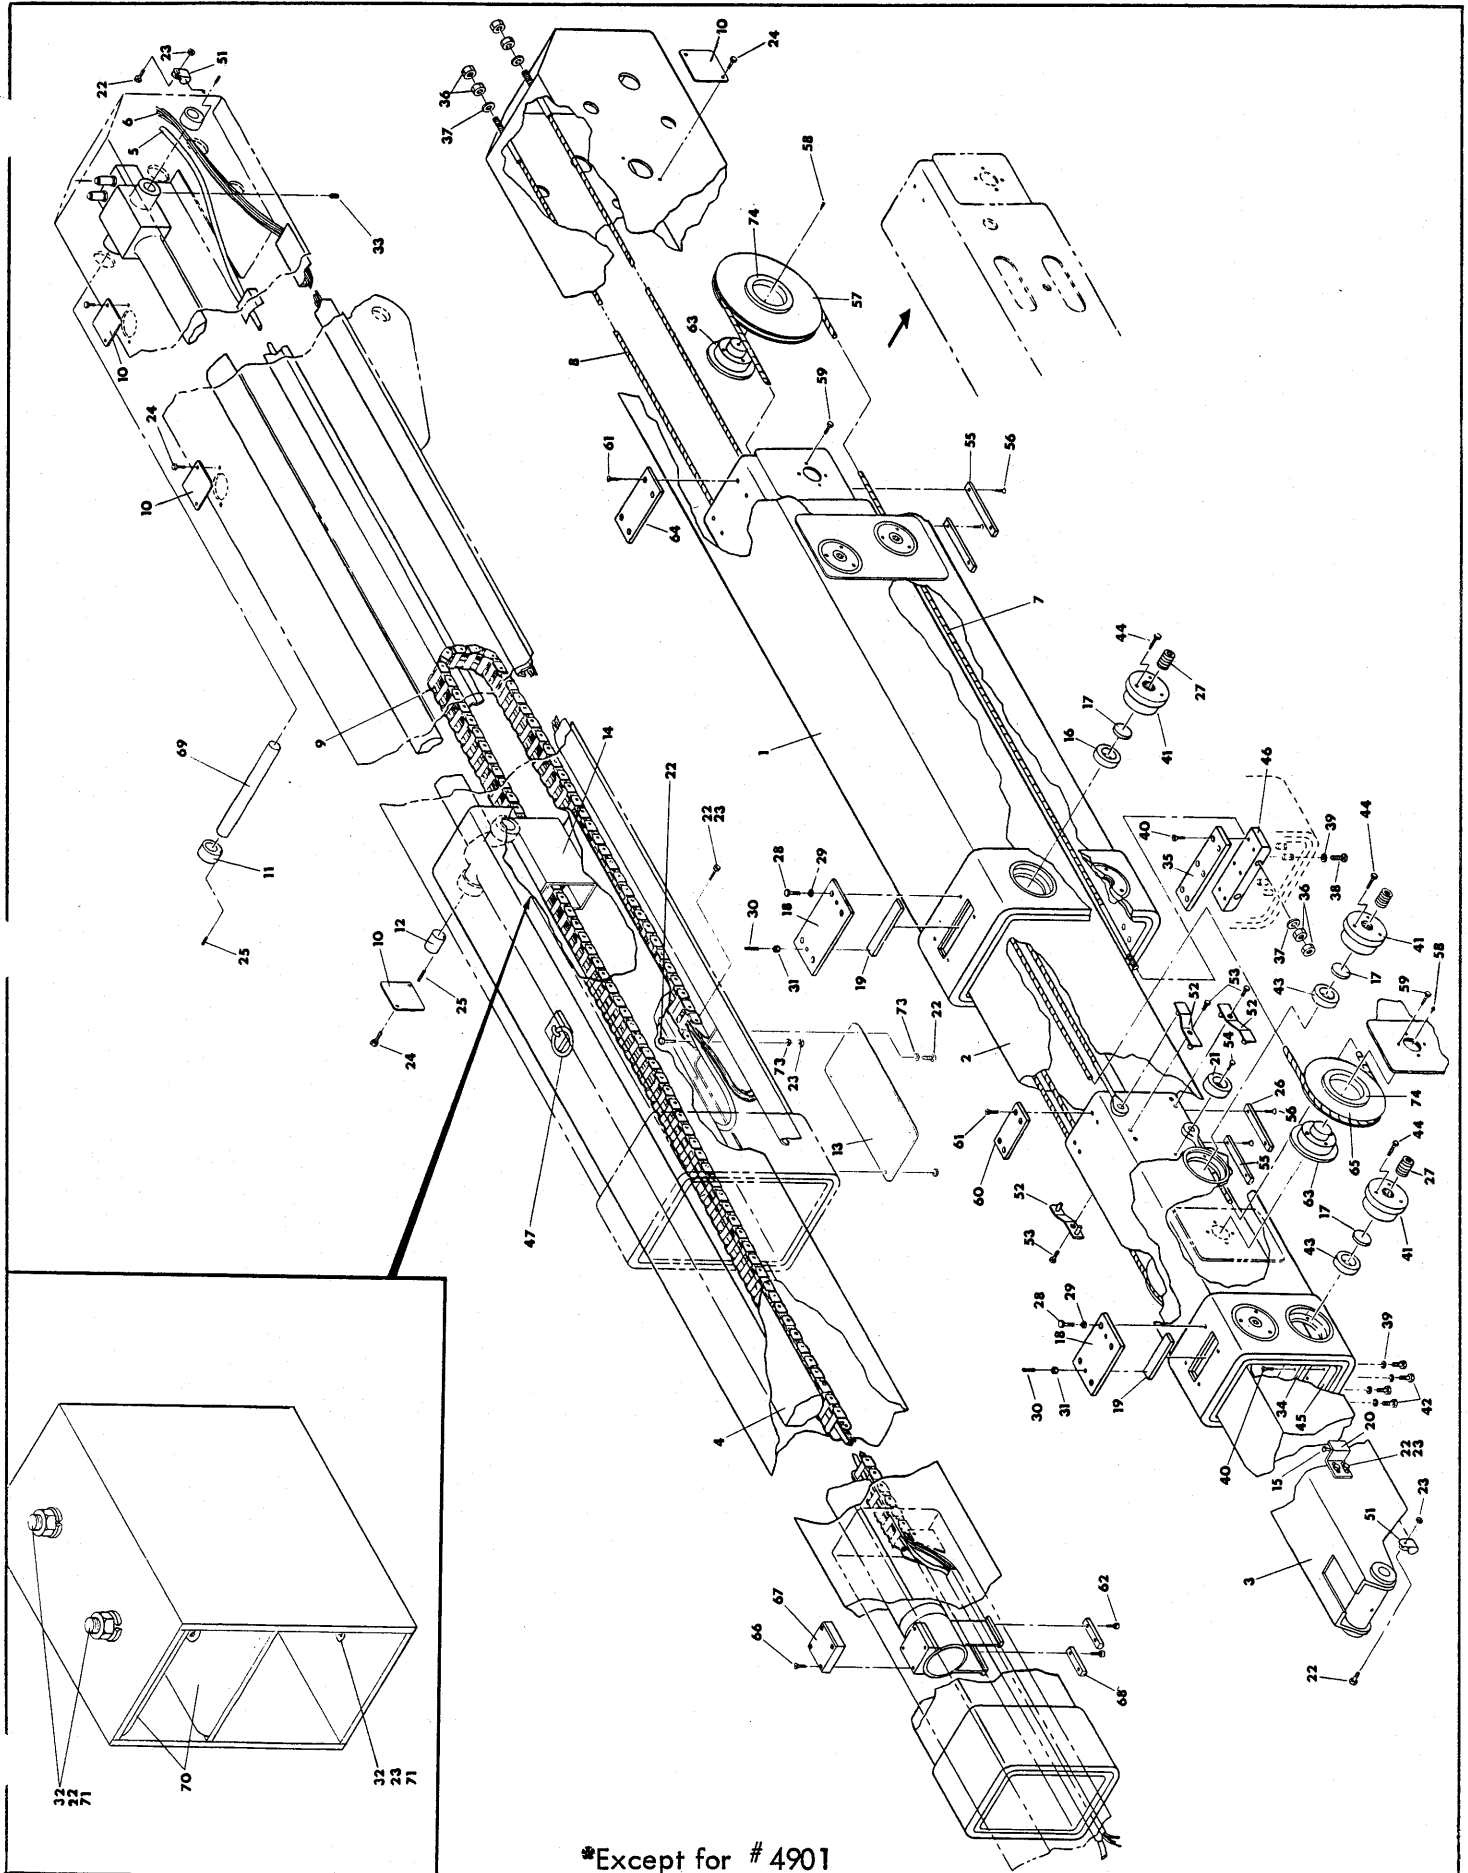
BOOM ASSEMBLY (58,68) Beginning with Serial # 4934
